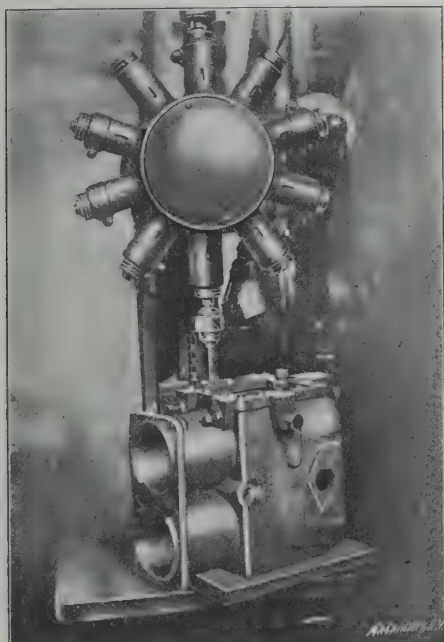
Drilling and Tapping Holes for Water Jacket Cover
